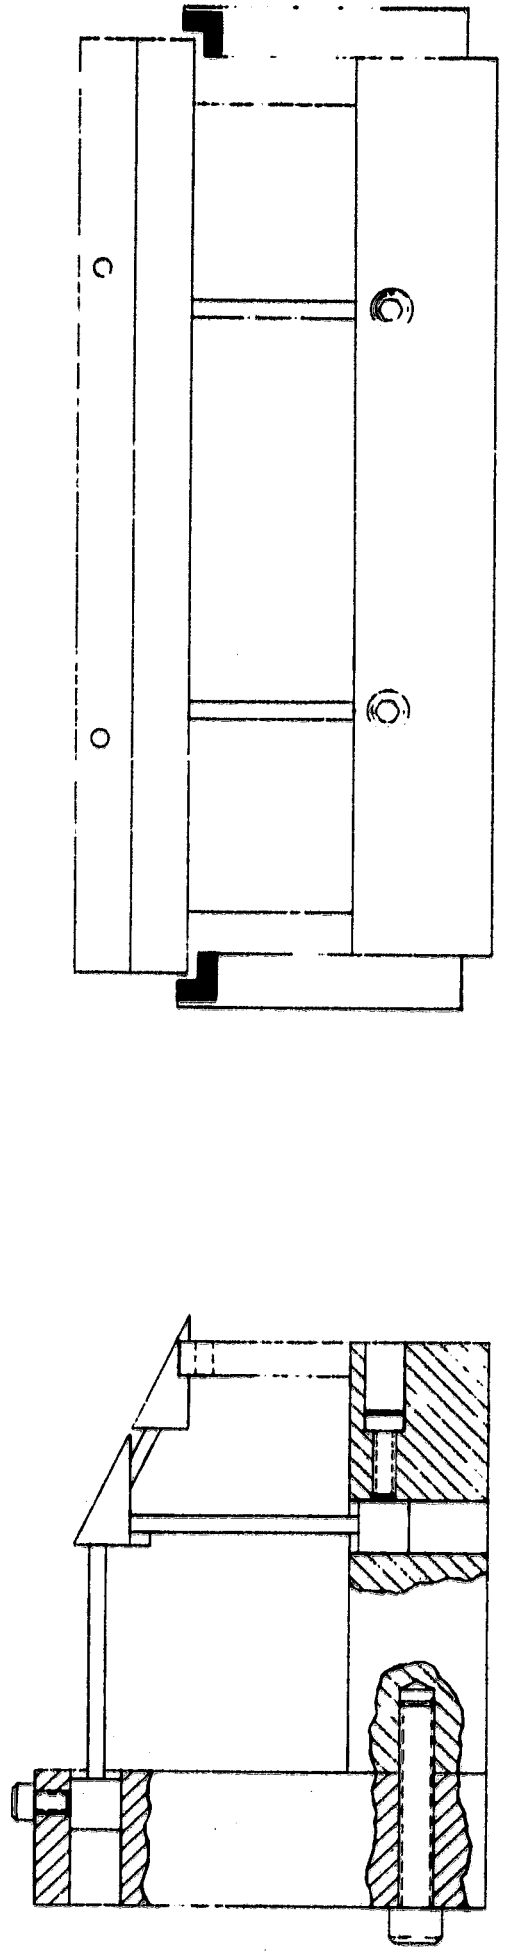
Vibration Fixture and Dual Patch Assembly
